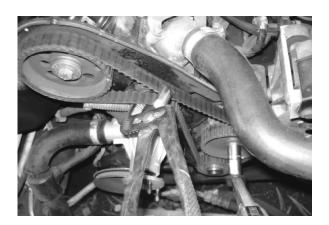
Install the tensioner roller. Slip on the *old* timing belt over all the pulleys. Use the large pliers to hold both the underside and upper side of the *old* belt as shown while you torque the intermediate shaft bolt to 37 ft-lbs. You can also torque the overhead camshaft bolt now using the same technique, or you can wait to do the overhead camshaft bolt when the crankshaft pulley holder is in place. Slip old timing belt off.
